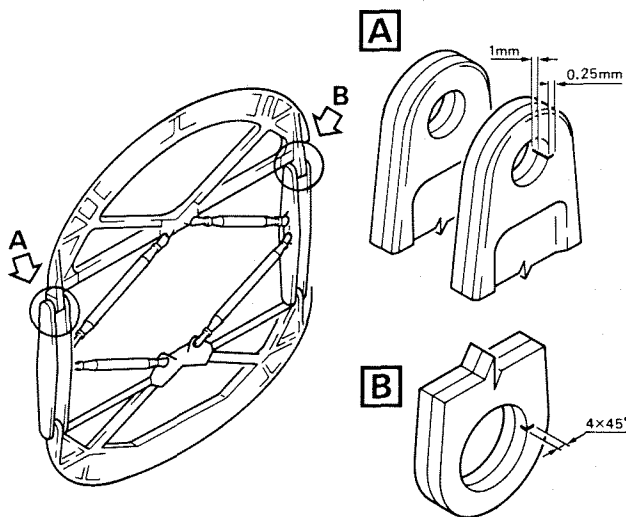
Damages in Fuselage/Horizontal Tailplane Attachment Lugs
